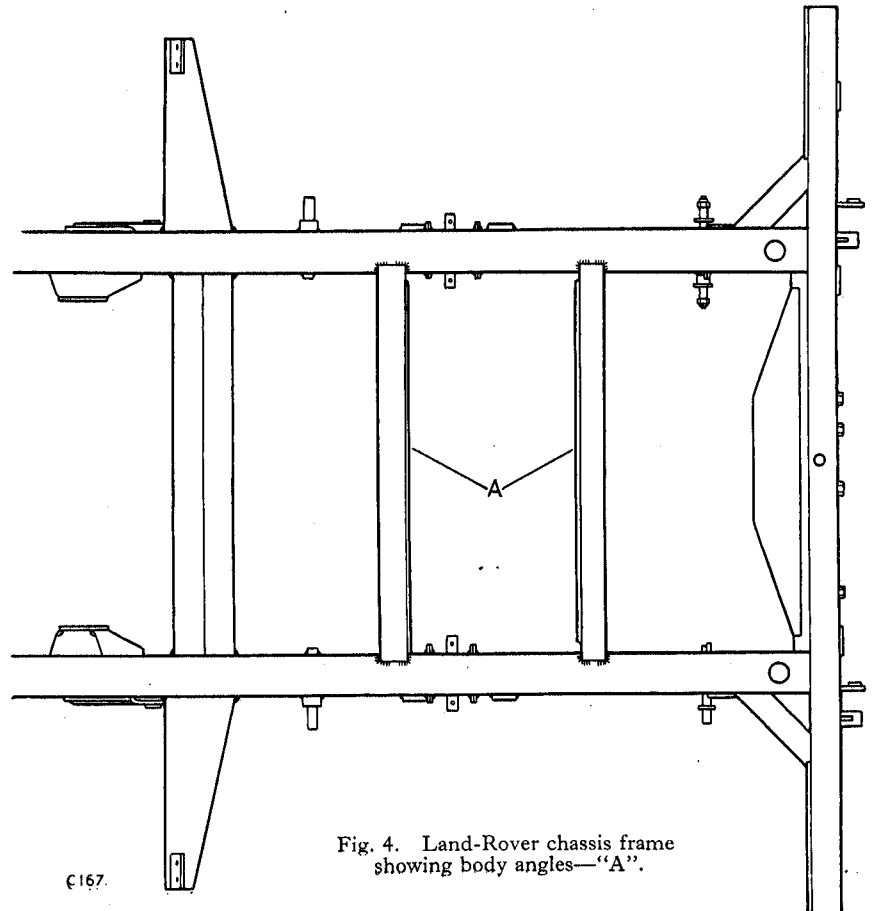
Land-Rover chassis frame showing body angles—"A".
